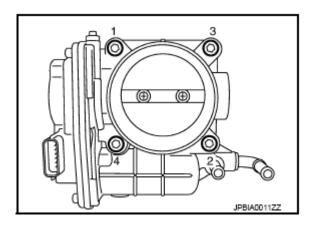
Electric Throttle Control Actuator Mounting Bolt Tightening
